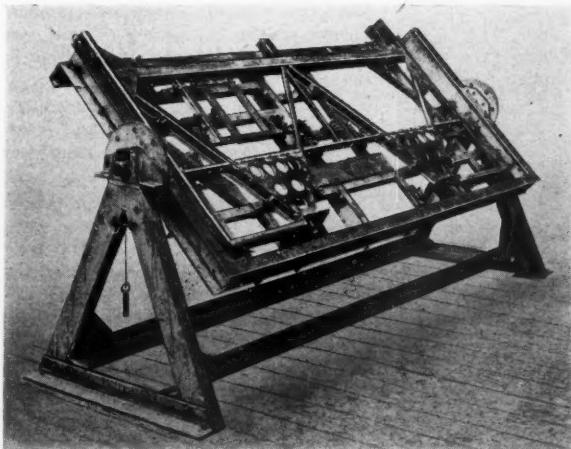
Welding jig for front bulkhead main structure.
